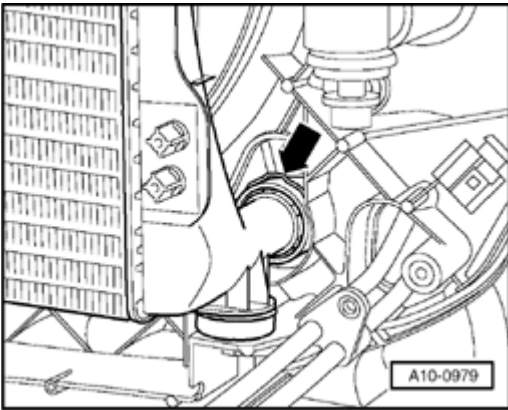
Disconnecting Lower Coolant Hose From Radiator
